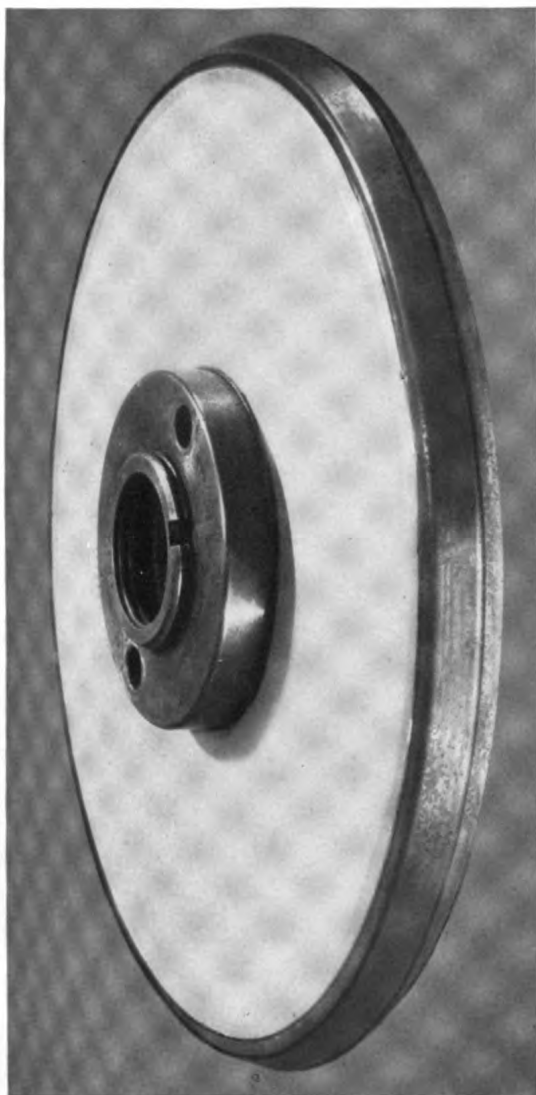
Form-turned, diamond form-charged, this wheel is highly efficient in carbide form grinding.
